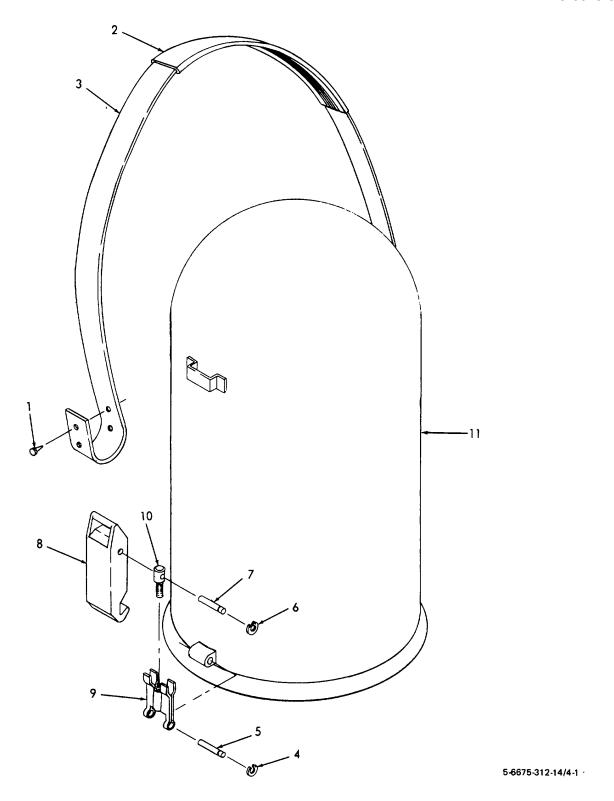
Metal carrying case metal hood, disassembly and assembly.
